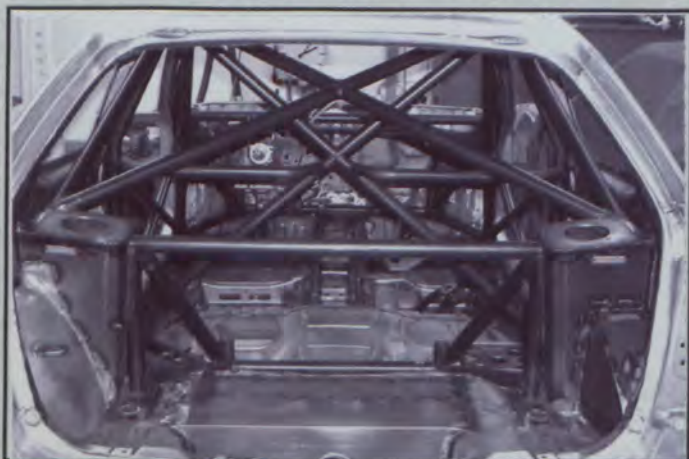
FRONT TURRET CROSS SUPPORT
